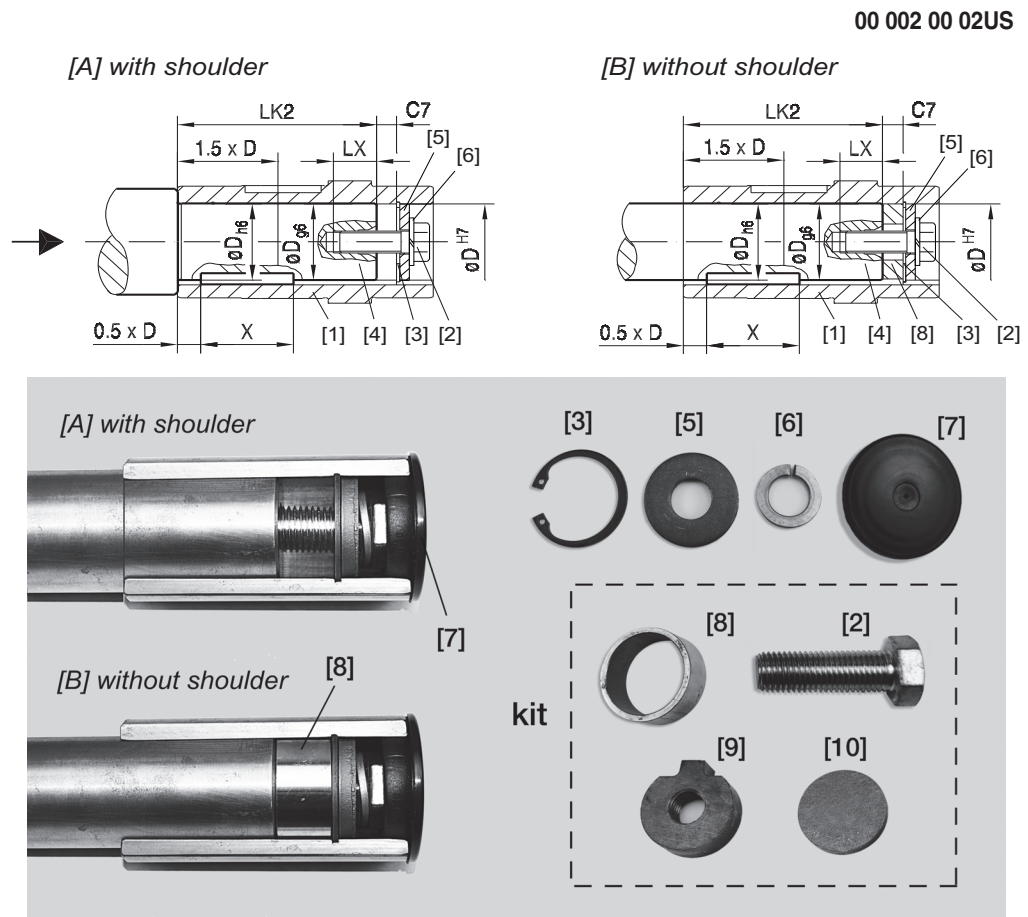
Customer shaft with contact shoulder (A) and without contact shoulder (B)
